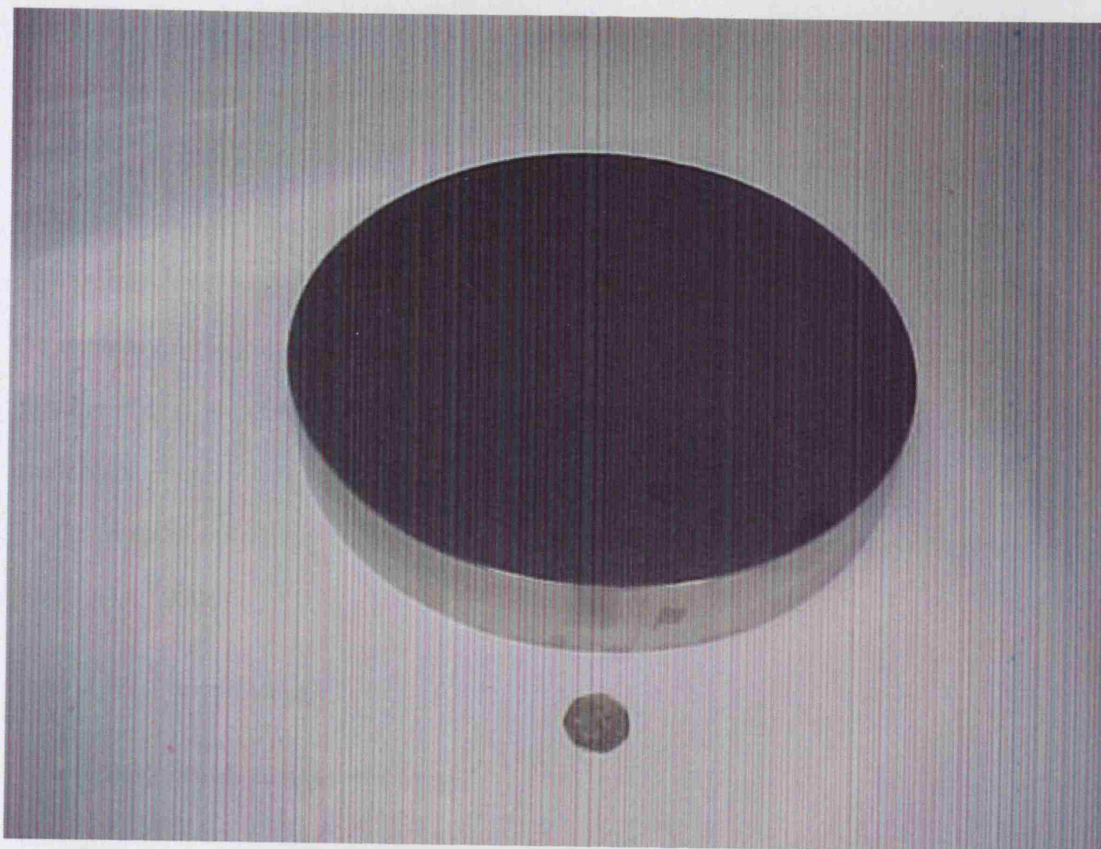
Stainless steel mold used for laying up of the composite mirrors.
